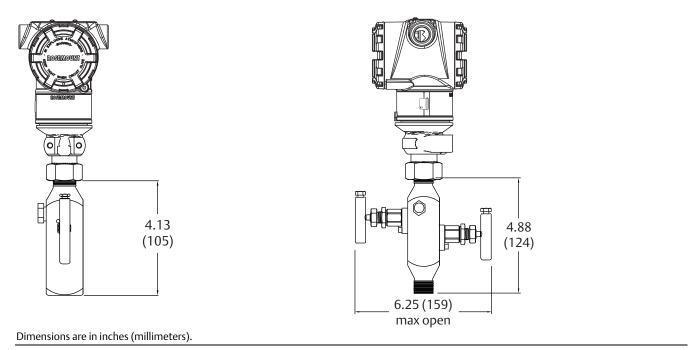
Rosemount 3051T with Rosemount 306 2-Valve Integral Manifold
